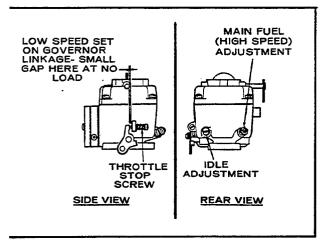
MAIN FUEL AND IDLE VALVE ADJUSTMENT
